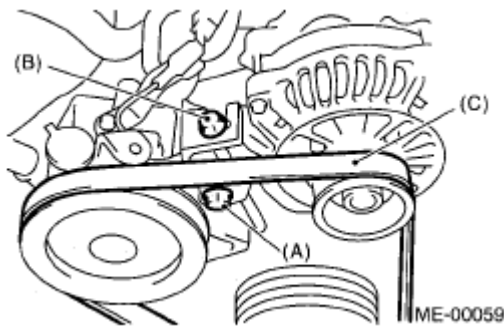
Identifying Lock Bolt, Slider Bolt And Collector Cover
